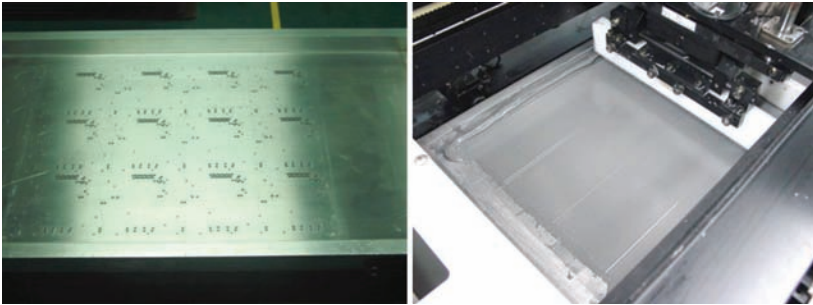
Solder paste stencil plate (left) and inline solder paste (right) printing for Sony's multi-spot soldering process.
